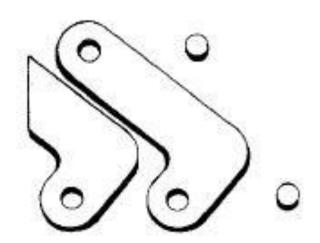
The resulting scrap strip and parts removed in testing the new layout.
